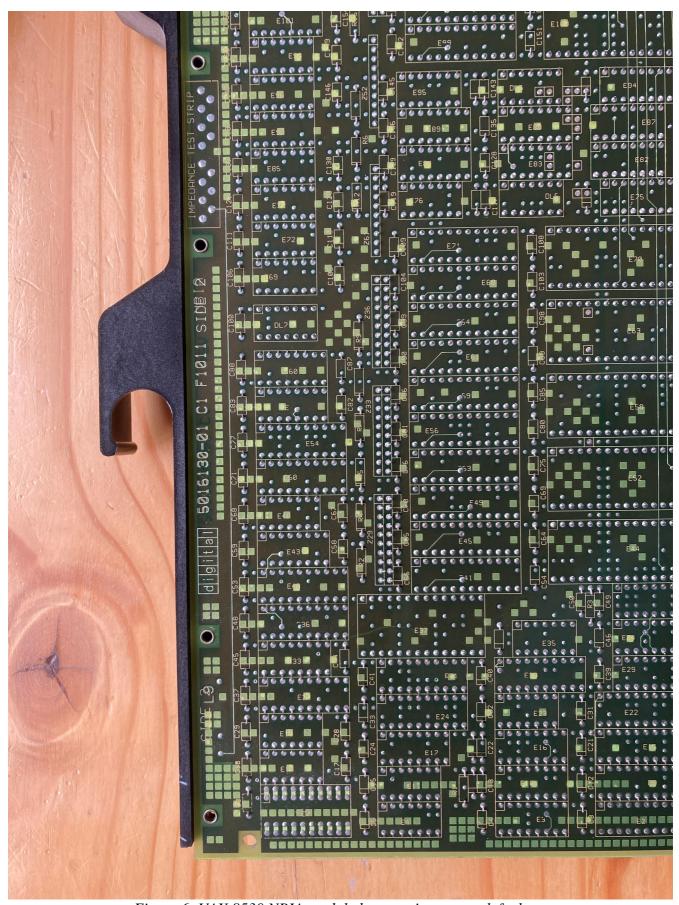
VAX 8530 NBIA module bottom view, upper left closeup
